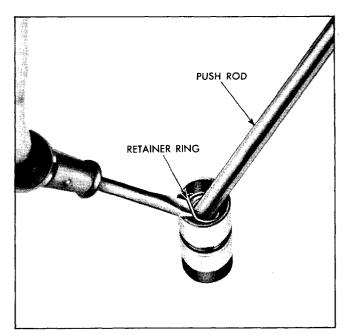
Removing Push Rod Seat Retainer Ring
